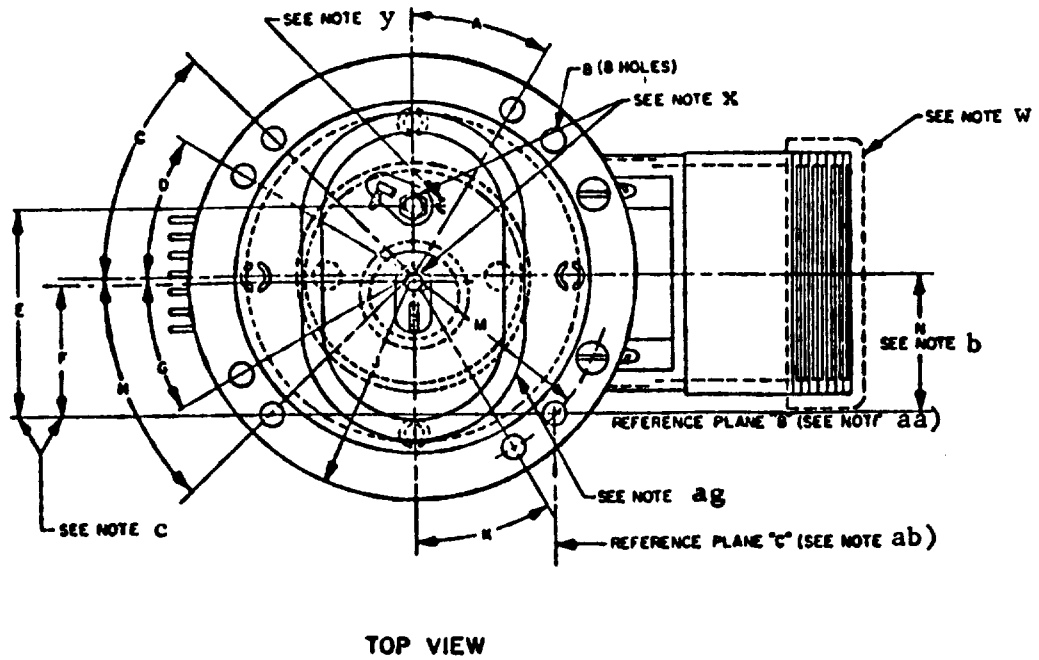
Outline drawing of electron tube types 5586 and 5657.
